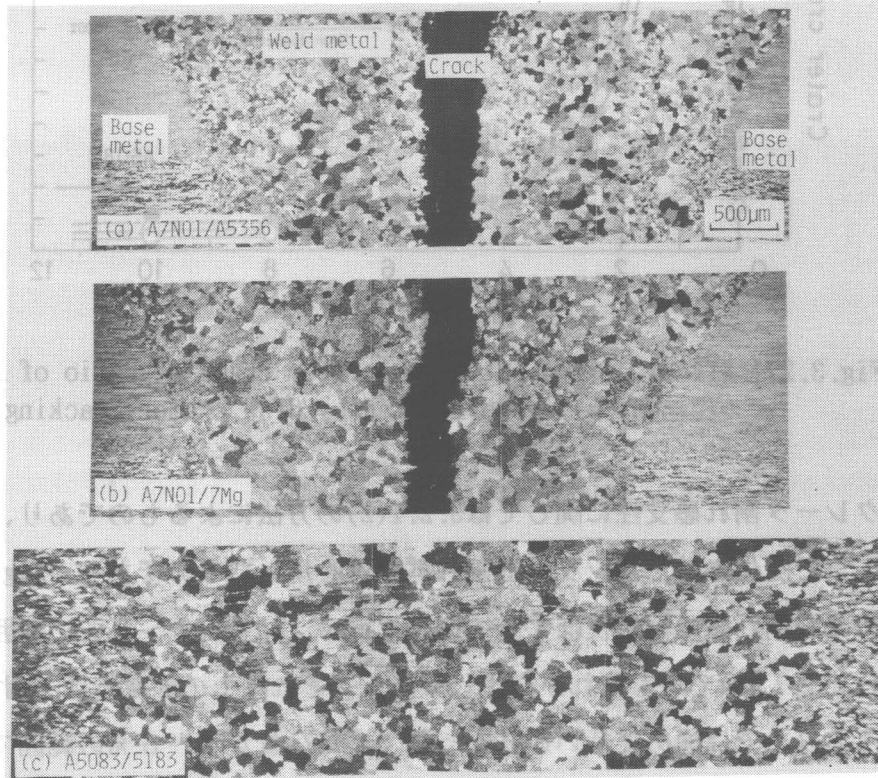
Crosssectional macrostructures of GMA weld bead.
